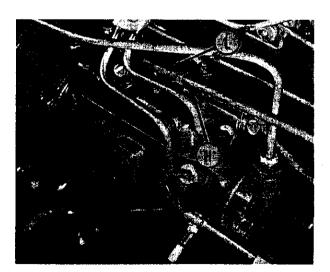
On late B-275 and all B-414, 354, 364, 384, 424, 444, 2424 and 2444 tractors having injection pump filted with mechanical governor the high (H) and low (L) idle speed adjusting screws are located as shown.
